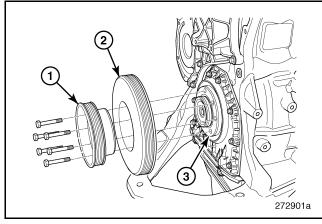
Fan Drive Pulley and Crankshaft Damper Assembly
